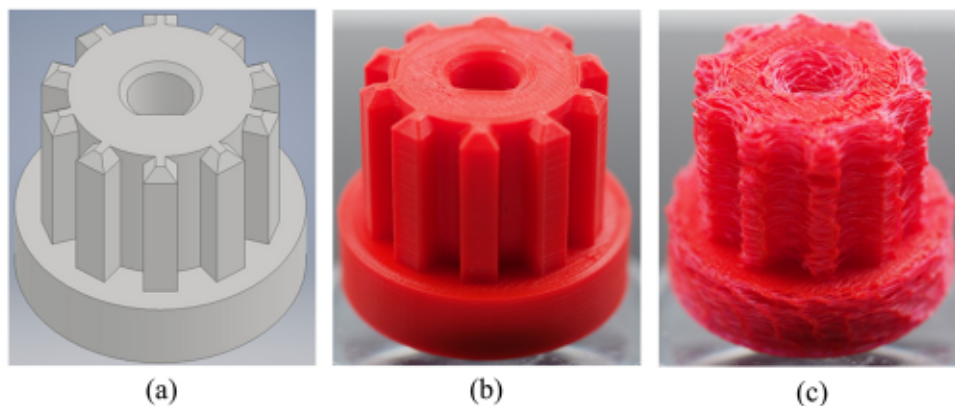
Geometry spectrum of the designed and printed parts. (a) CAD design, (b) normal printed part, (c) printed part with clearly visible geometric defects.
